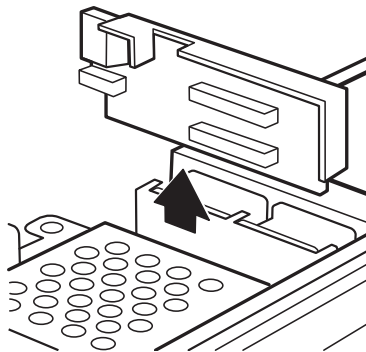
Lifting the SAS IF Assembly From the Chassis
